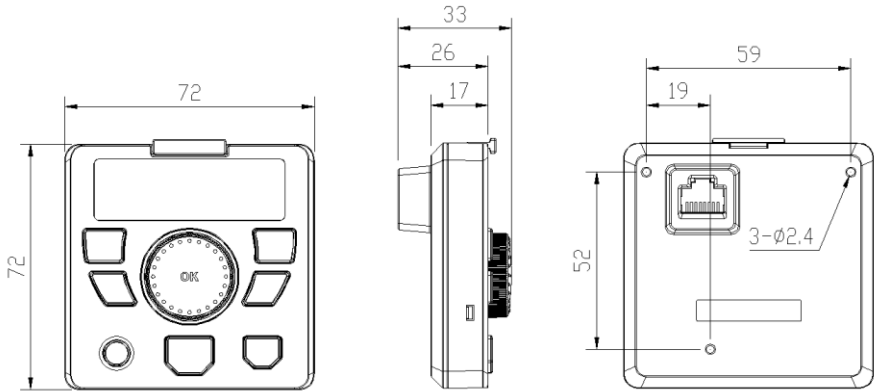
Installation Dimensions of Single Display External Keyboard (mm)
